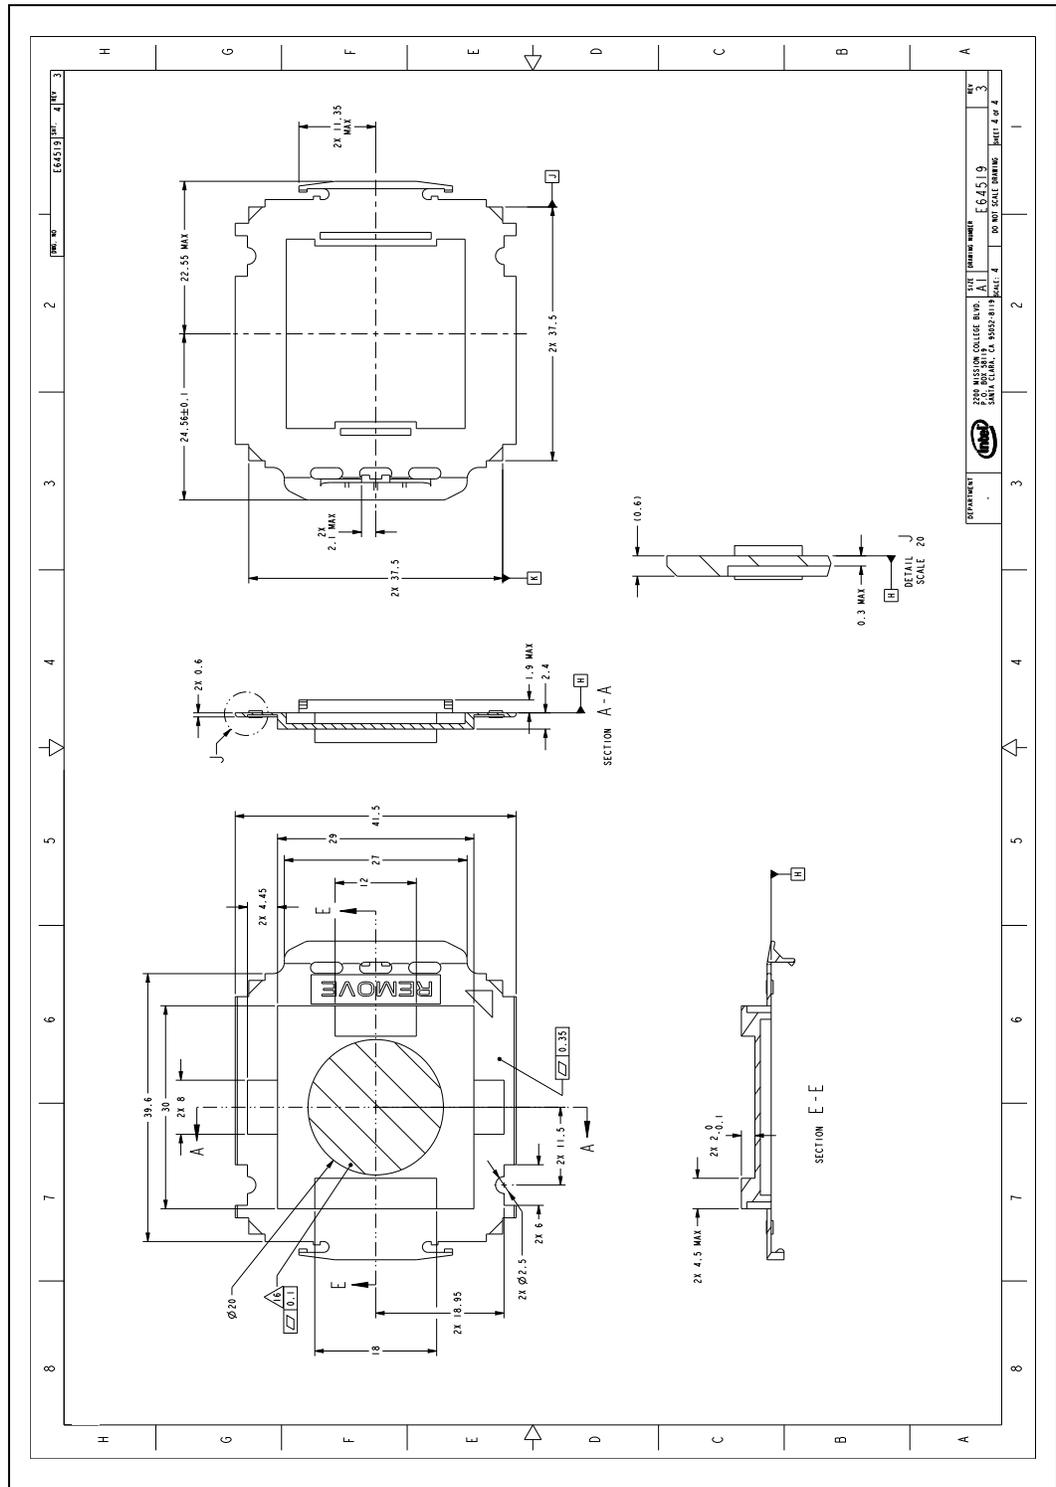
Socket Mechanical Drawing (Sheet 4 of 4)
